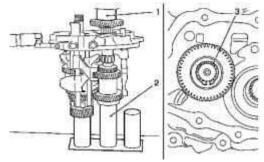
Press-fit pinion 5-th transmission: 1 - a special tool, 2 - a special tool, 3 - circlip
